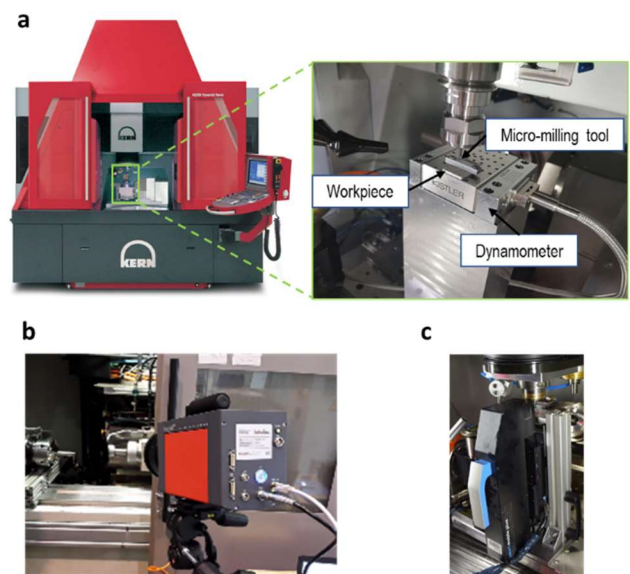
Exemplary integrated measuring devices into machine tools. a) dynamometer, b) thermographic camera, c) confocal microscope
